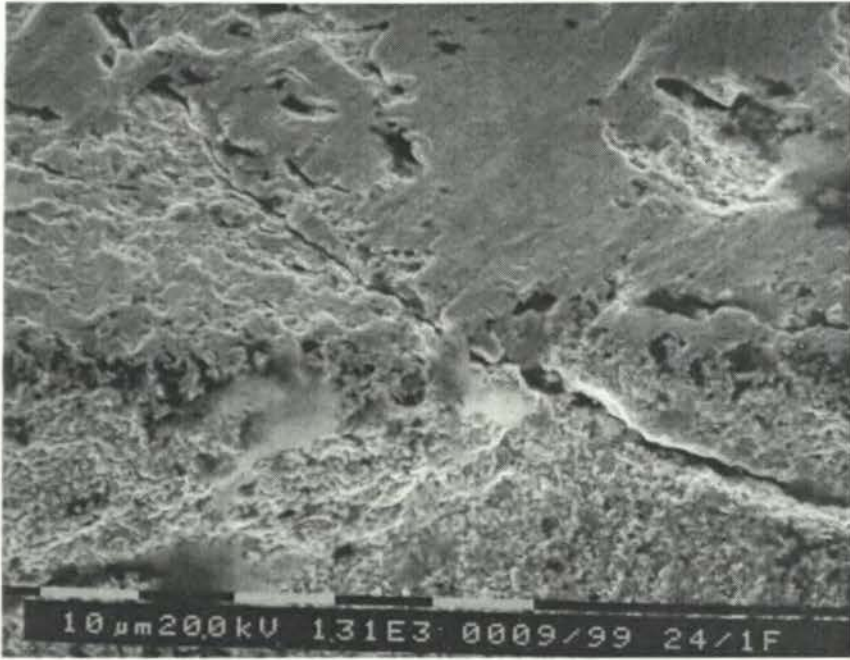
122 Magnified view of the cutting edge of failed KC730 tool in Figure 7.120 showing cracking
